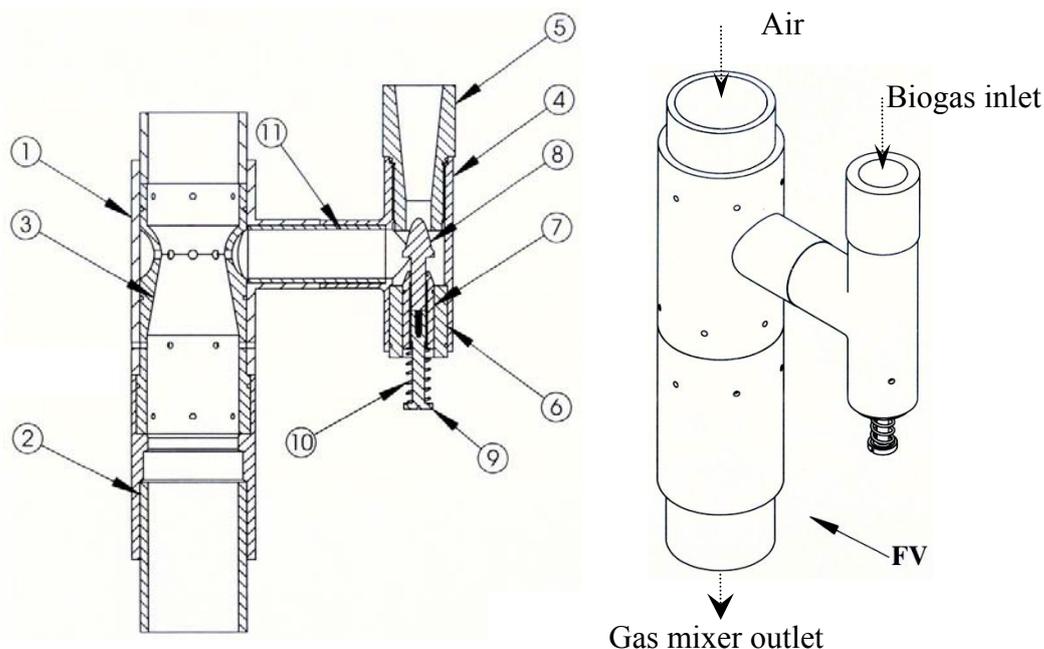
Biogas carburettor design: (1) Venturi housing, (2) Venturi base, (3) Venturi mixer, (4) Metering housing, (5) Main jet, (6) Metering adjusting nut spacer, (7) Metering adjusting nut, (8) Metering needle, (9) Metering adjusting screw, (10) Return spring, and (11) Pipe junction
